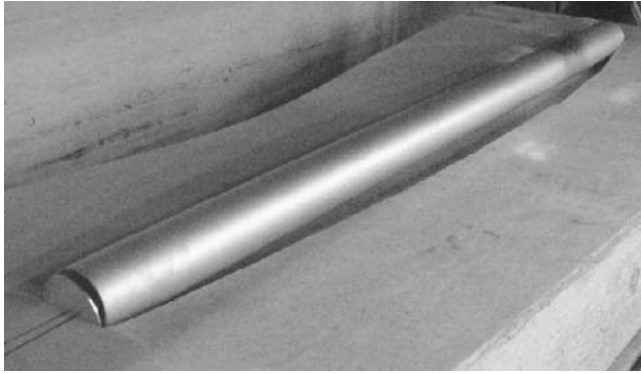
Phase II ceramic die showing the tube ends cradled inside the ceramic die cavity
